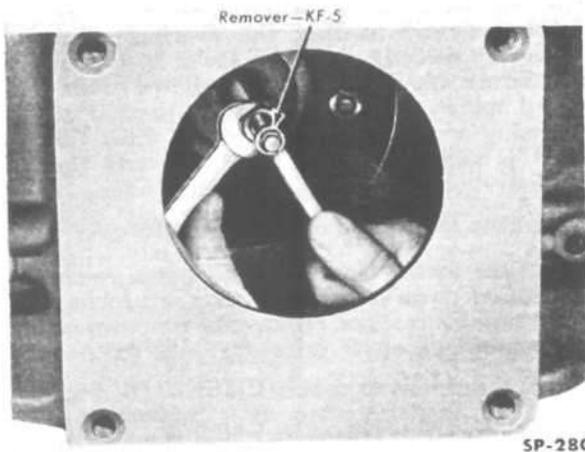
REMOVING CRANKSHAFT PILOT BUSHING
